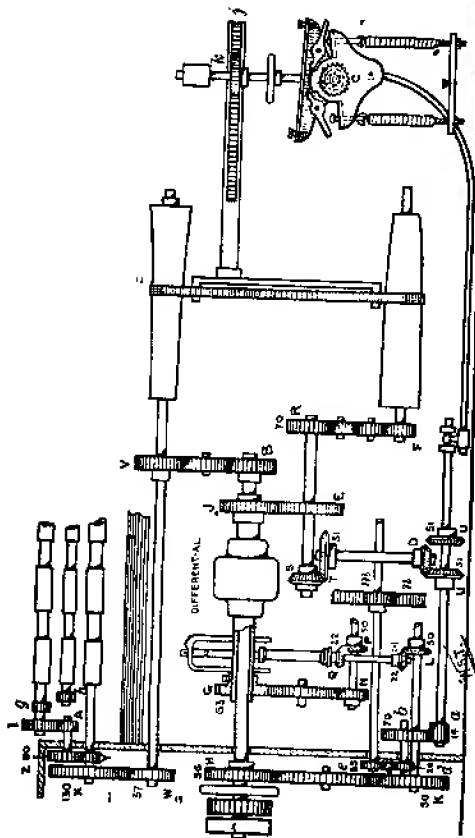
GEARING OF FLYER AND BOBBIN FRAME.
